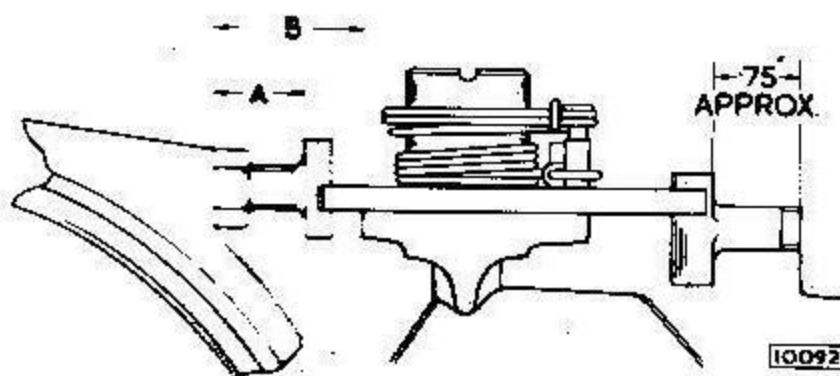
The toggle settings for ‘Daimatic’ gearbox
